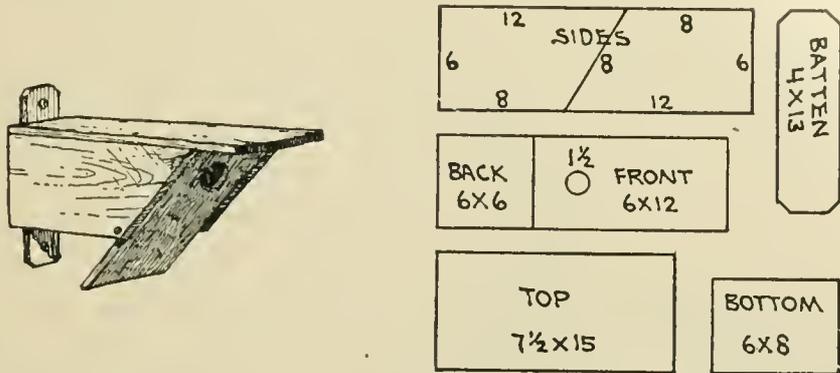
Swallow box, supposed to be cat proof, and details of construction.
